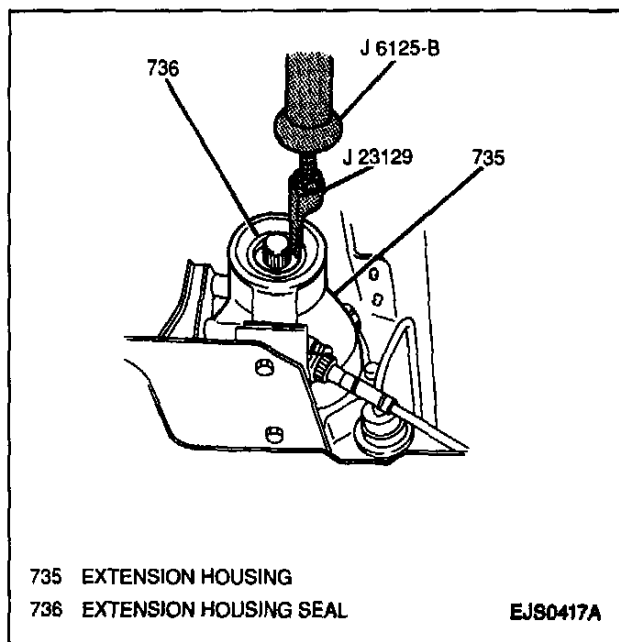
Removing Extension Housing Seal (3L30, 3-Speed)
